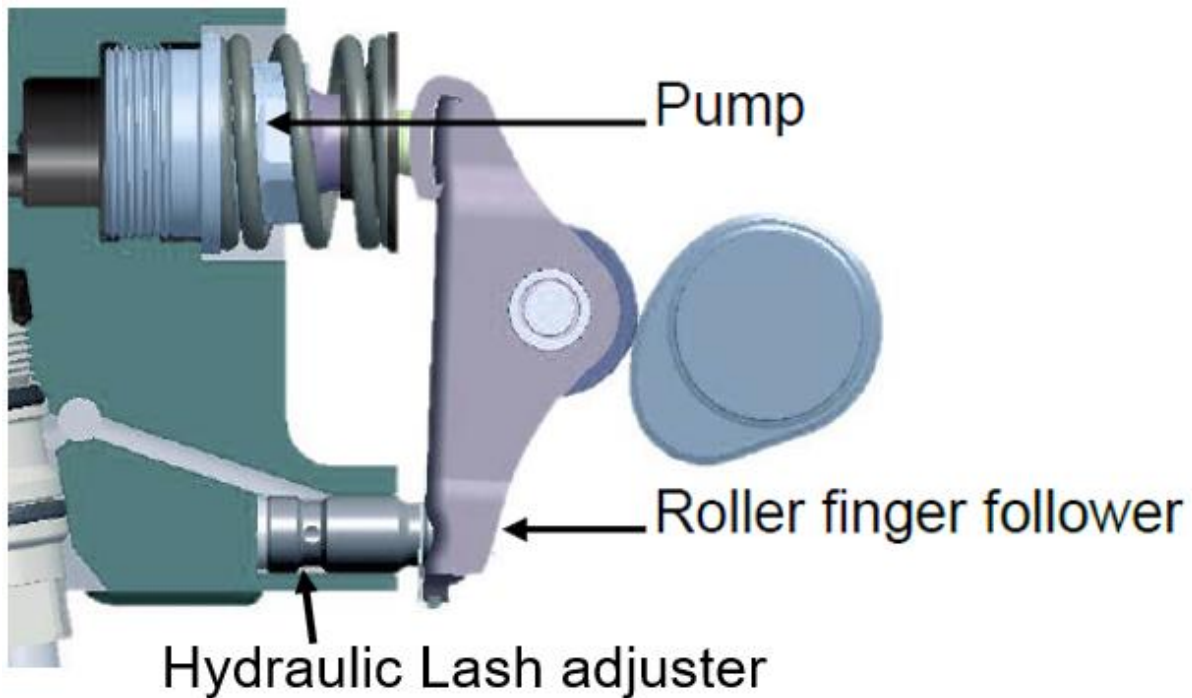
UNIAIR CROSS SECTION HIGHLIGHTING THE HYDRAULIC PUMP, ROLLER FINGER FOLLOWER AND HYDRAULIC LASH ADJUSTMENT (8).
